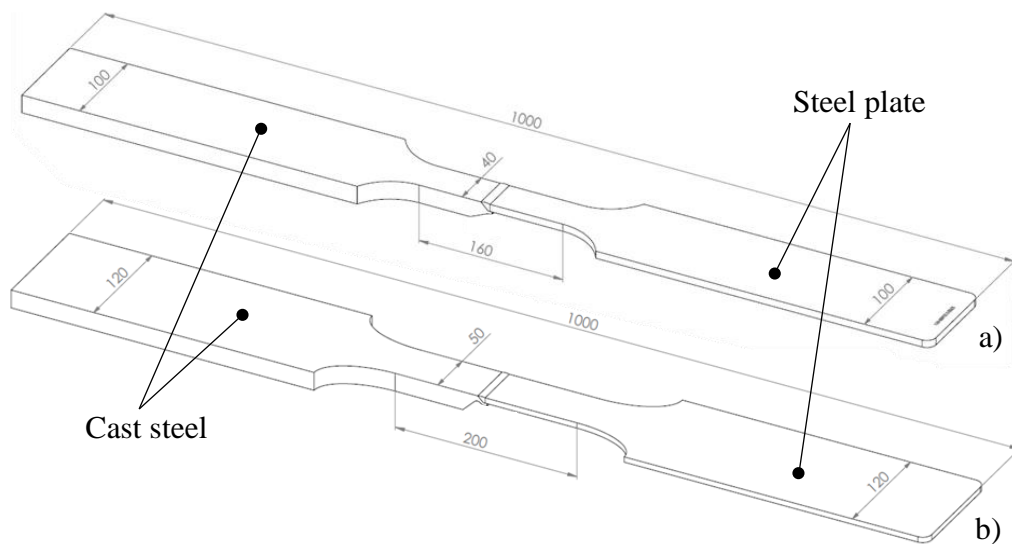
Dimensions of the finished test specimens, a) a test specimen for the quasi-static test and b) a test specimen for the fatigue test.
